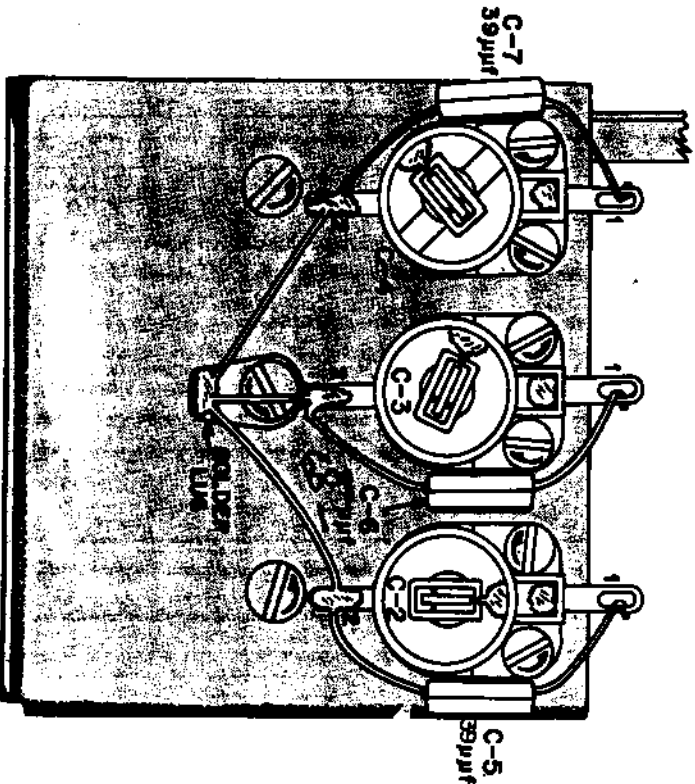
FIRST WIRING ON THE TUNING CHASSIS
